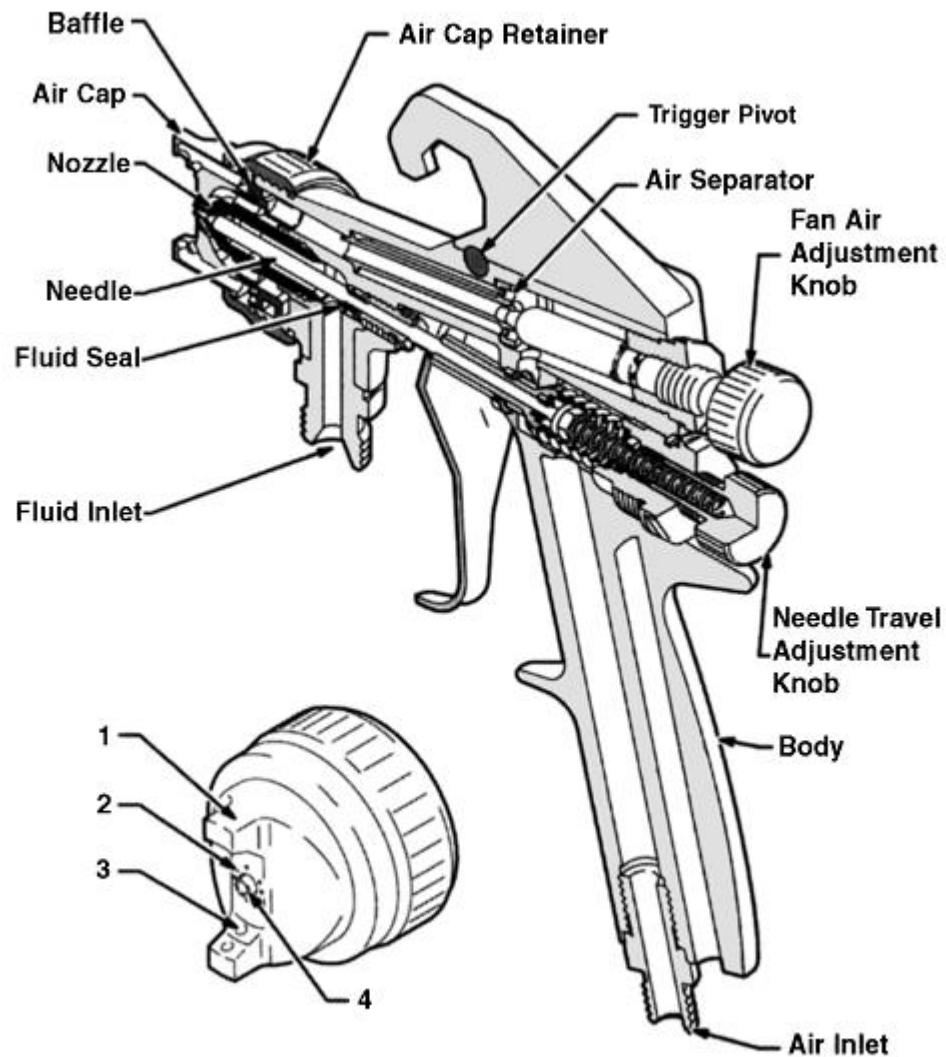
Cross section of an air spray gun and of spray gun nozzle (Delta Spray, Graco, Inc.). 1, Wings or horns; 2, angular converging holes; 3, side-port holes; 4, annular ring around the fluid tip.
